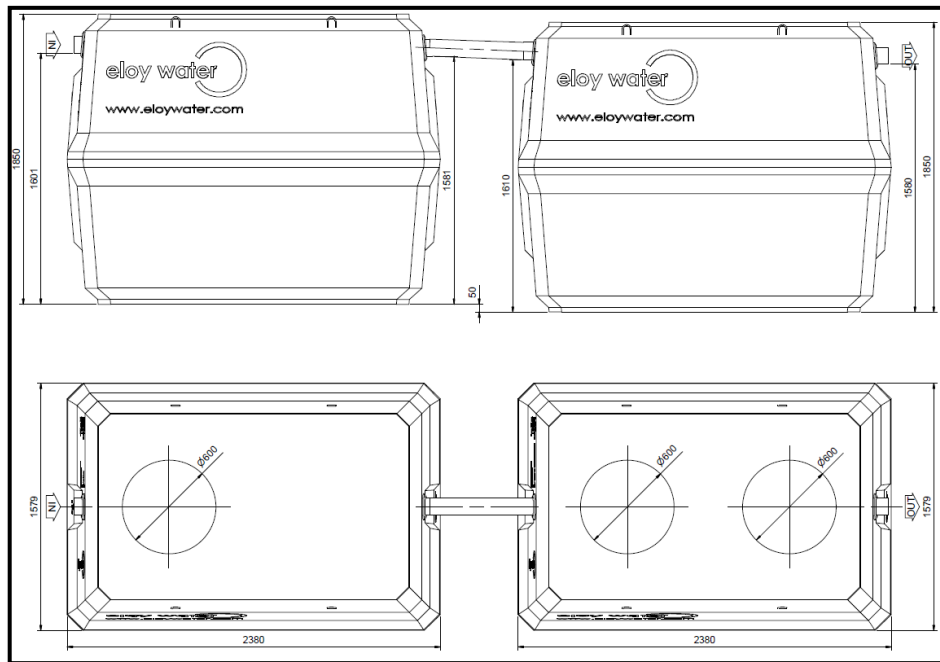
Dimensional drawing of the Oxyfix® C-90 MB 10 EP (2)
